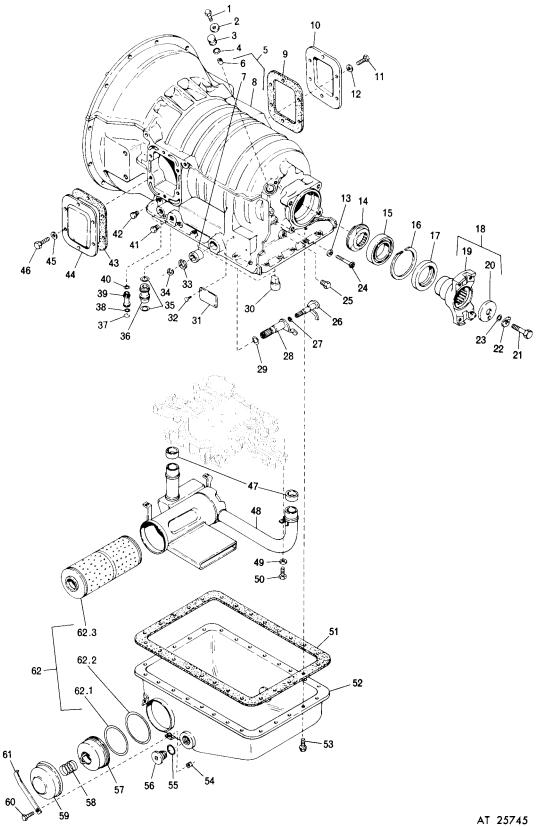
Transmission housing, oil filter, and oil pan-exploded view.
